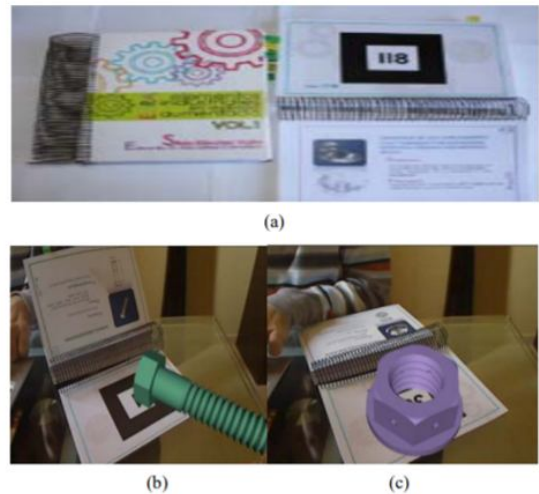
(a) Augmented book; (b) Examples of hex-head screw; (c) Examples hex-nut perforated [14].
